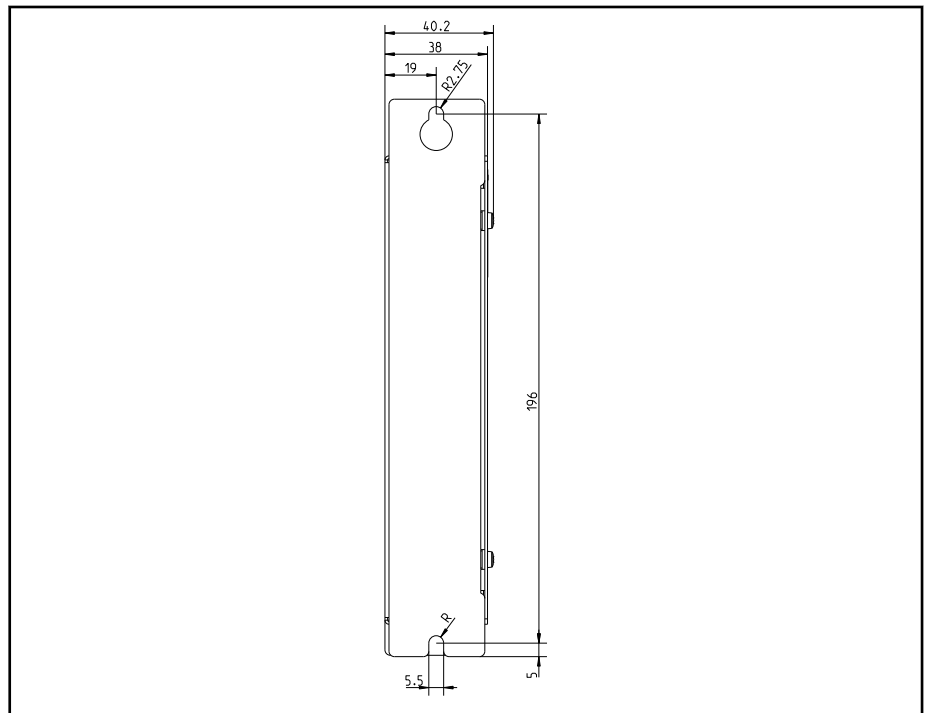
Dimensions of the Y-repeater – rear panel
